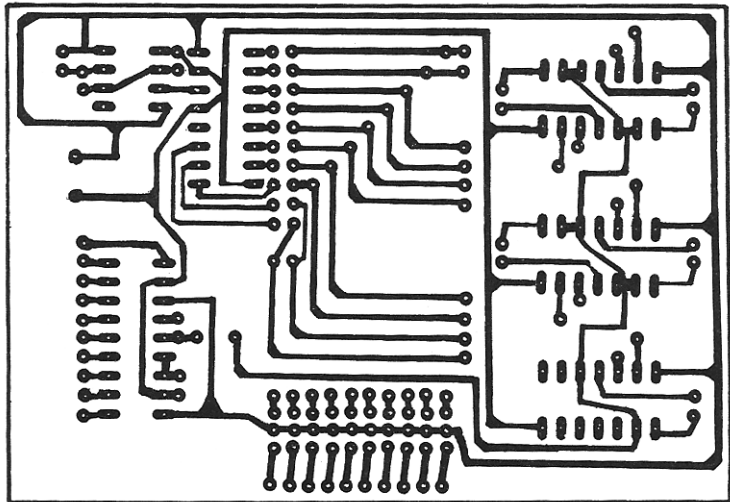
Actual-size PCB layout for the spectacular analyser.
